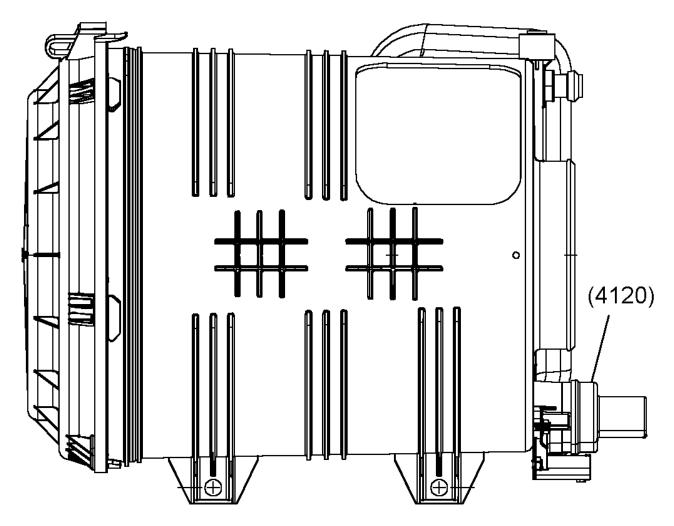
Air Intake Filter with Snow Valve (4120) SNOW VALVE MODULE
